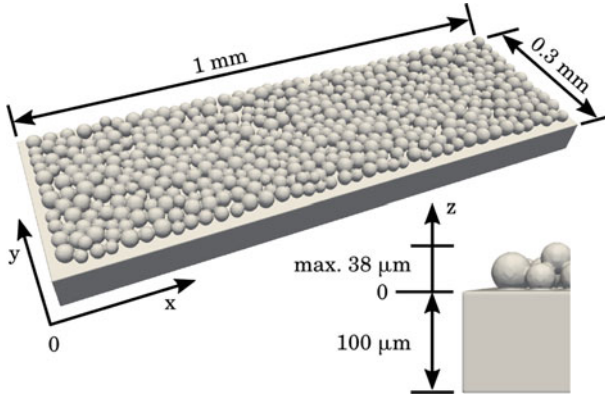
Geometry and dimensions of the fully resolved single track
